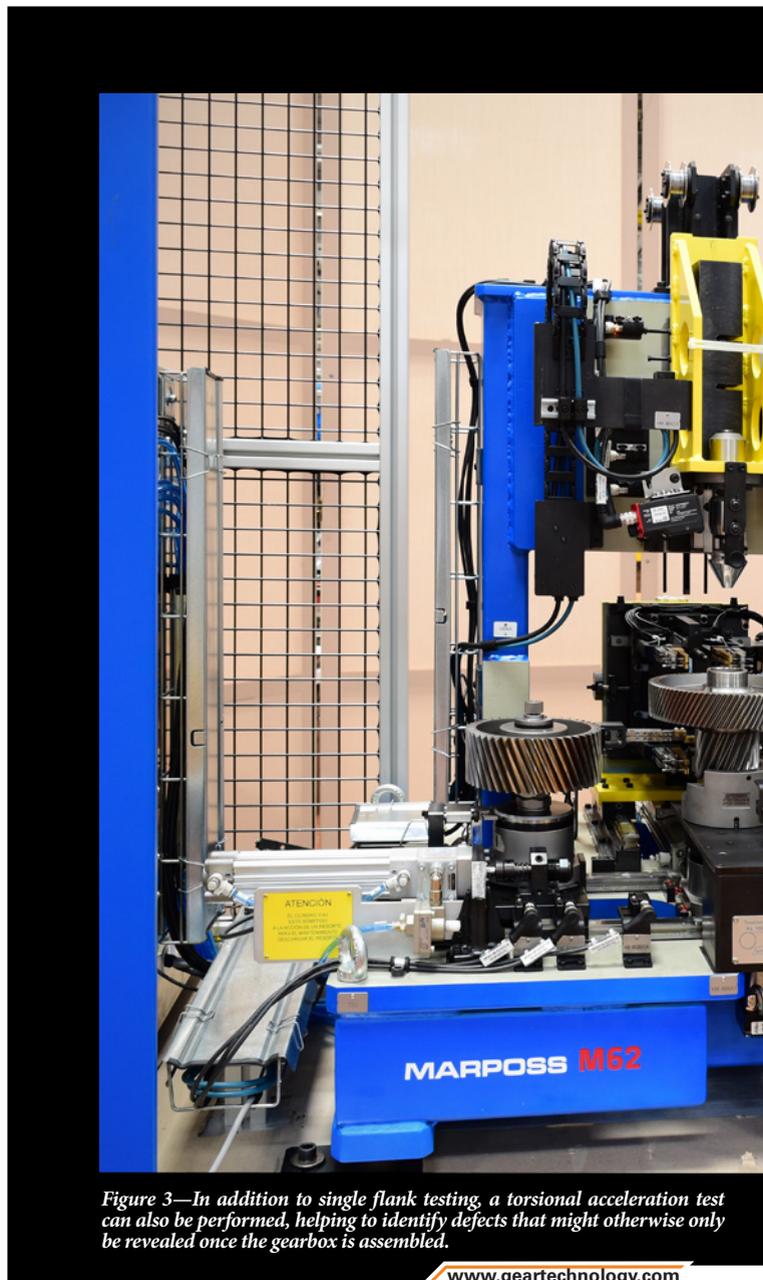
In addition to single flank testing, a torsional acceleration test can also be performed, helping to identify defects that might otherwise only be revealed once the gearbox is assembled.
